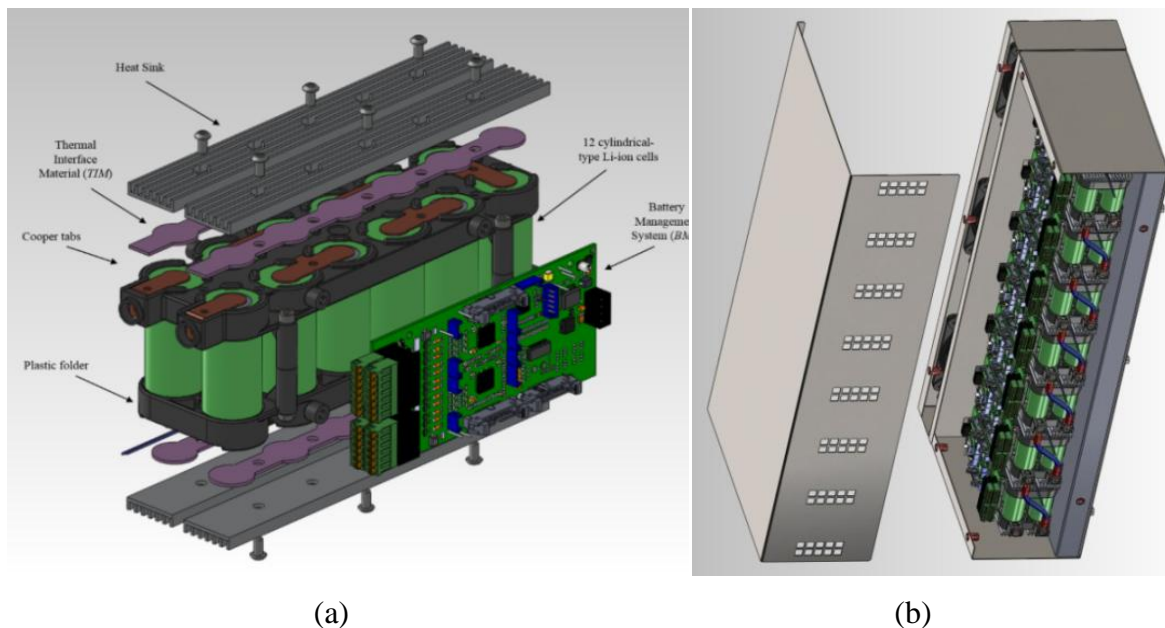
Exploded drawing of the design at (a) *BM* and (b) *BP* level.
